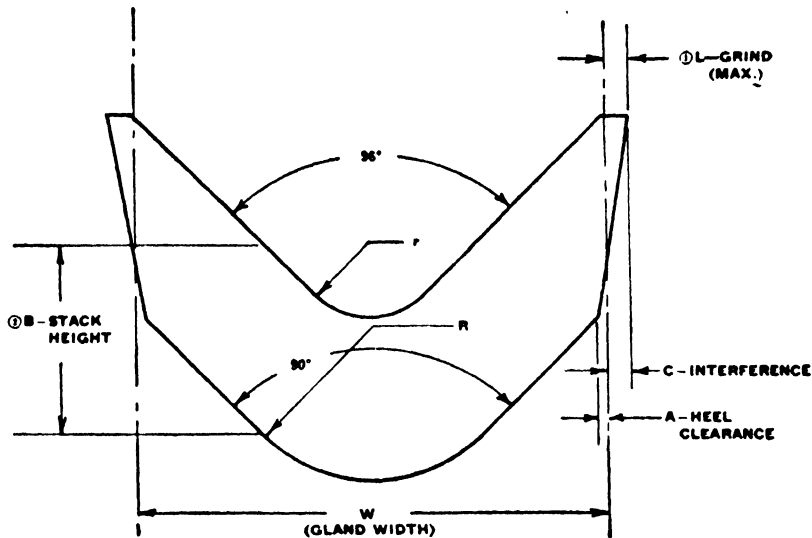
shows an enlarged cross section of the Linear V packing. Complete sets of V rings and fabric-reinforced adapters are furnished by the packing manufacturer. Where metal adapters are desired, they may be made from aluminum or bronze and must be designed to fit the packing. To this end, drawings may be secured from the packing manufacturer showing top and bottom rings to fit their particular make of packing.
